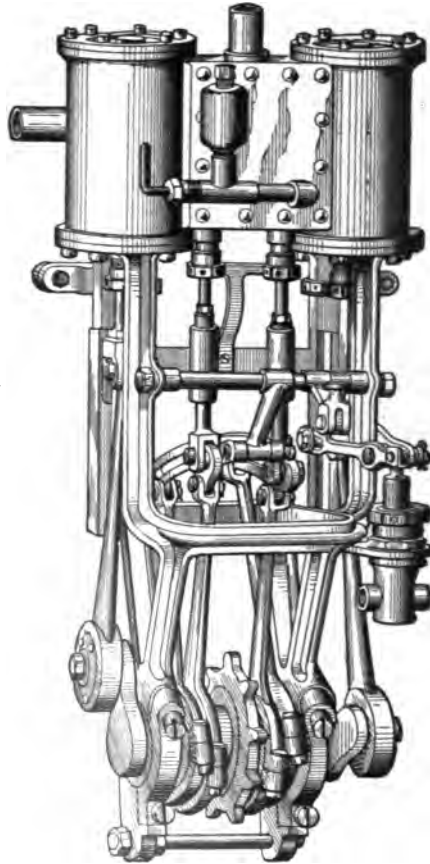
The "Locomobile" Steam Carriage Engine.
